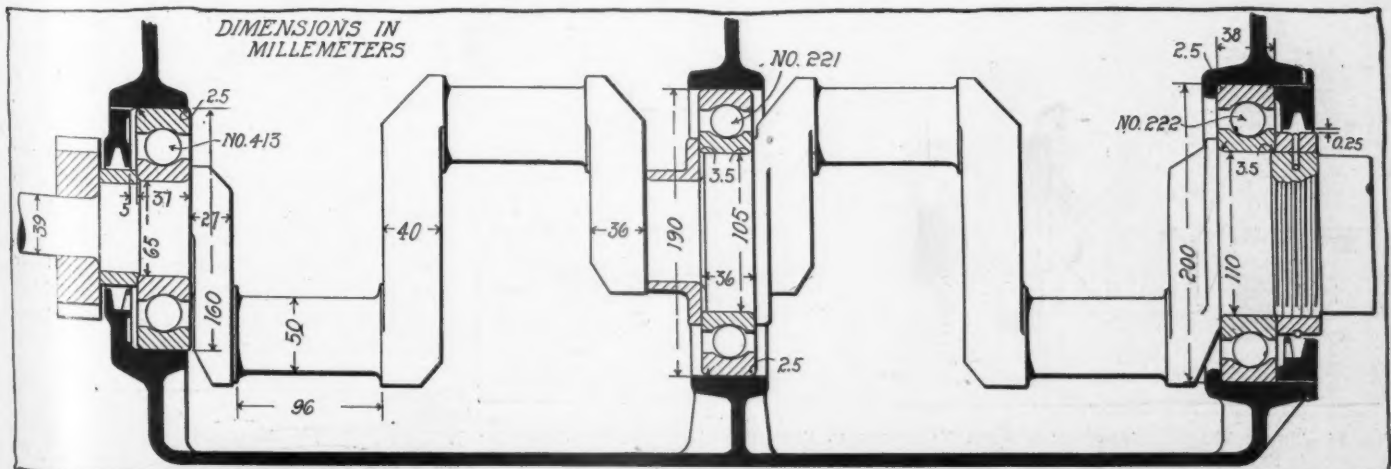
FOUR-CYLINDER MOTOR CRANKSHAFT ON F & S BALL BEARINGS, WITH FLANGED RETAINER FOR CENTRAL BEARING
